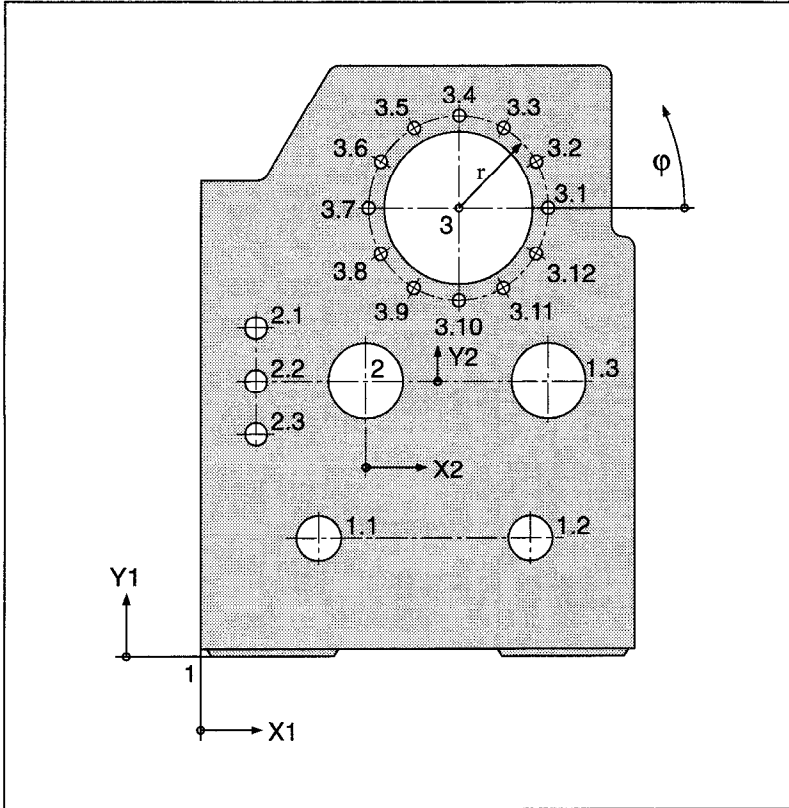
Incremental dimensions in polar coordinates (designated with G91)
